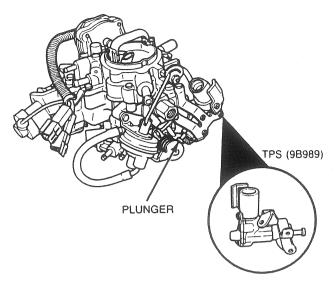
Linear TP sensor. (Courtesy of Ford Motor Co.)
